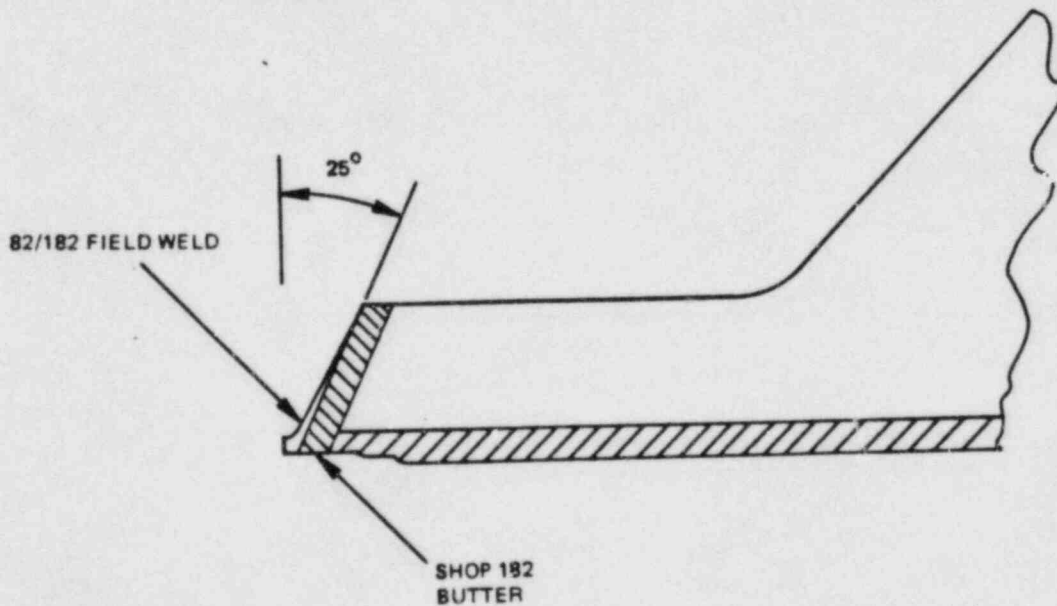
Configuration for Nozzles Where Unacceptable Indications in Field Weld Require Removal by Machining, Resulting in a Reduced Butter Thickness
